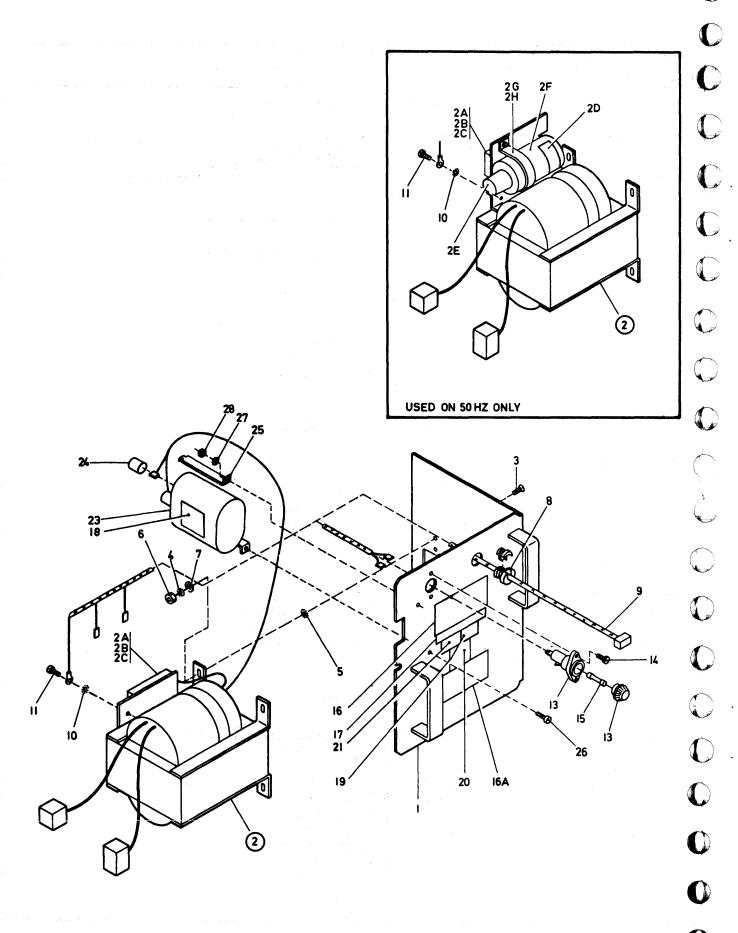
TRANSFORMER ASSEMBLY. TR 105
